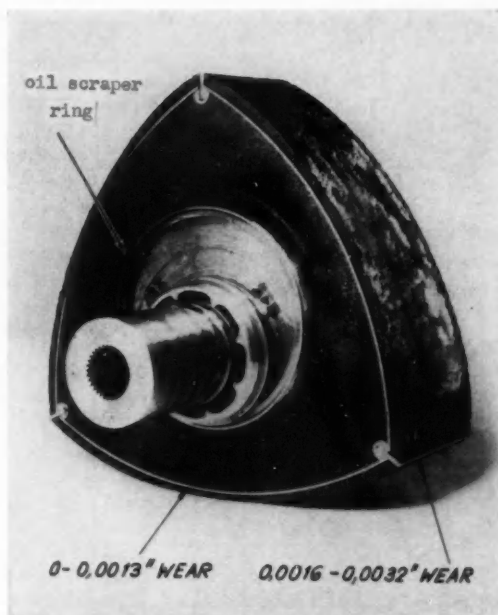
Photo of KKM 250 rotor (taken after 100-hr endurance run) shows that only the sealing line of contact is in metal-to-metal contact with surrounding housing. Gummy deposit visible in space between gas seals and oil seal is easily wiped off.
